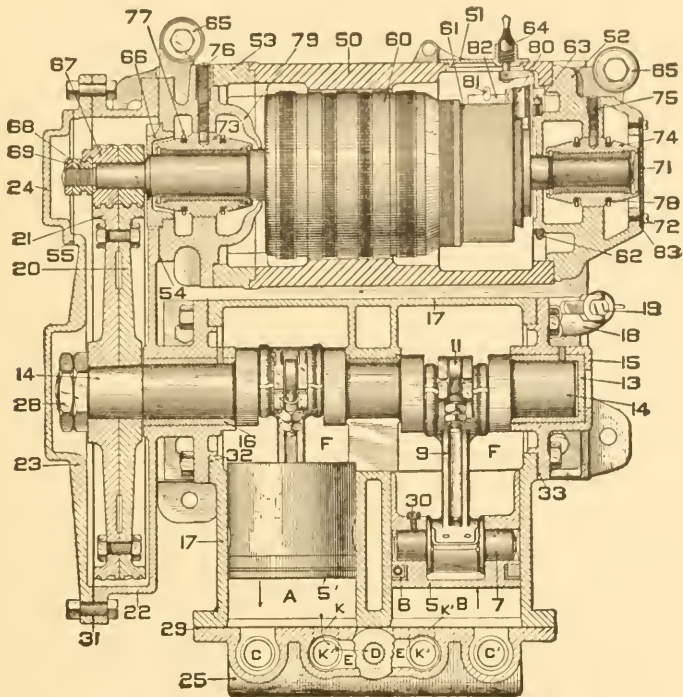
Sectional Views of Westinghouse Type "D-EG" Motor-Driven Air Compressor
